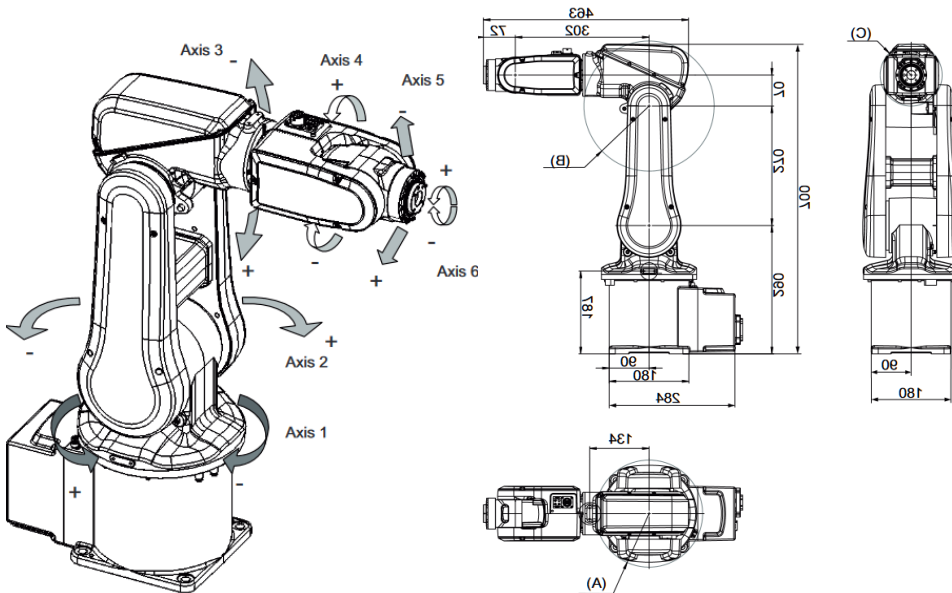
Six axes of the ABB IRB120 robot and joint dimensions [6]
